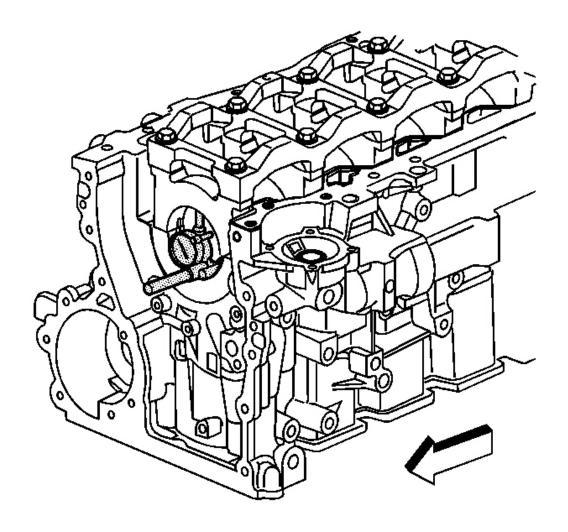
Measuring Bearing Bore Concentricity & Alignment Courtesy of GENERAL MOTORS CORP.
